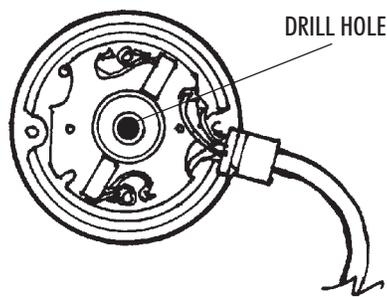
Drill a 1/4" hole in the center of the end cap.
